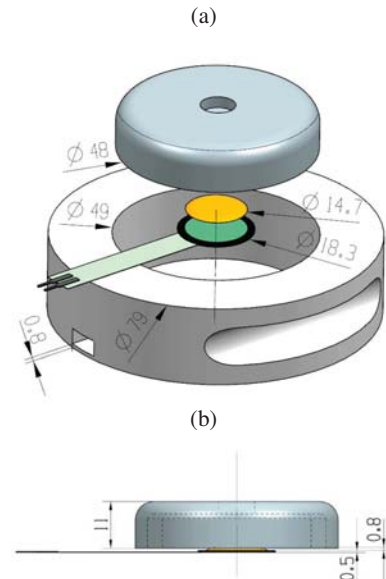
Sensor design. (a) An isometric exploded view. (b) An orthogonal side view showing the magnet on top, the FSR at the bottom and the epoxy layer between them. Dimensions are in mm.
